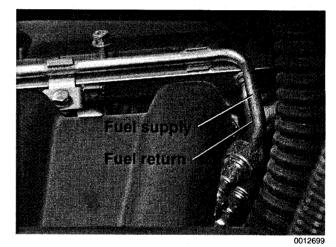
Special fuel line fitting at fuel rail on M52/S52US engine. Use BMW special tool 16 1 050 to release locking fittings at ends of fuel lines.
